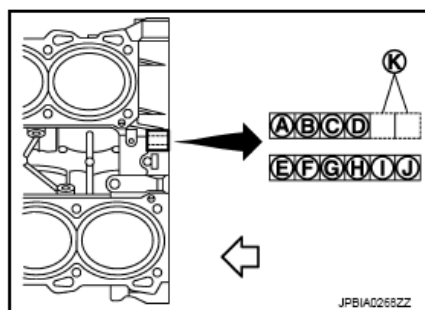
Identifying Cylinder Bore Grade On Rear Side Of Cylinder Block
